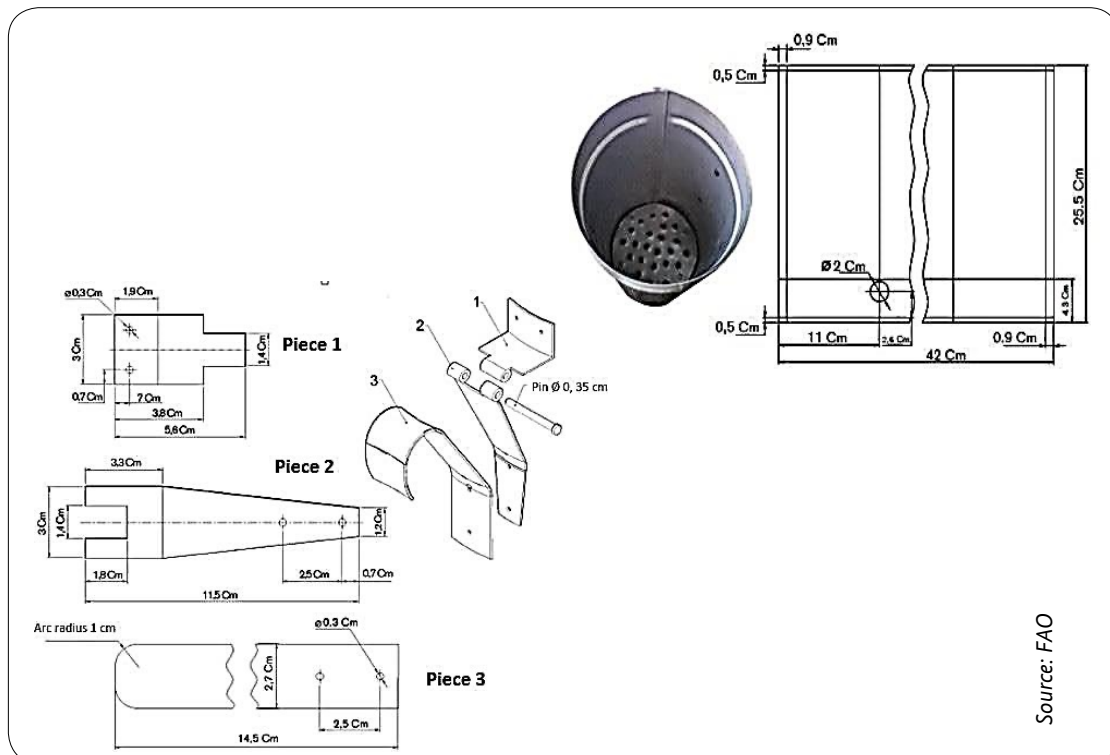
Hinges, hooks, measurements of the cylinder and combustion chamber of the barrel
